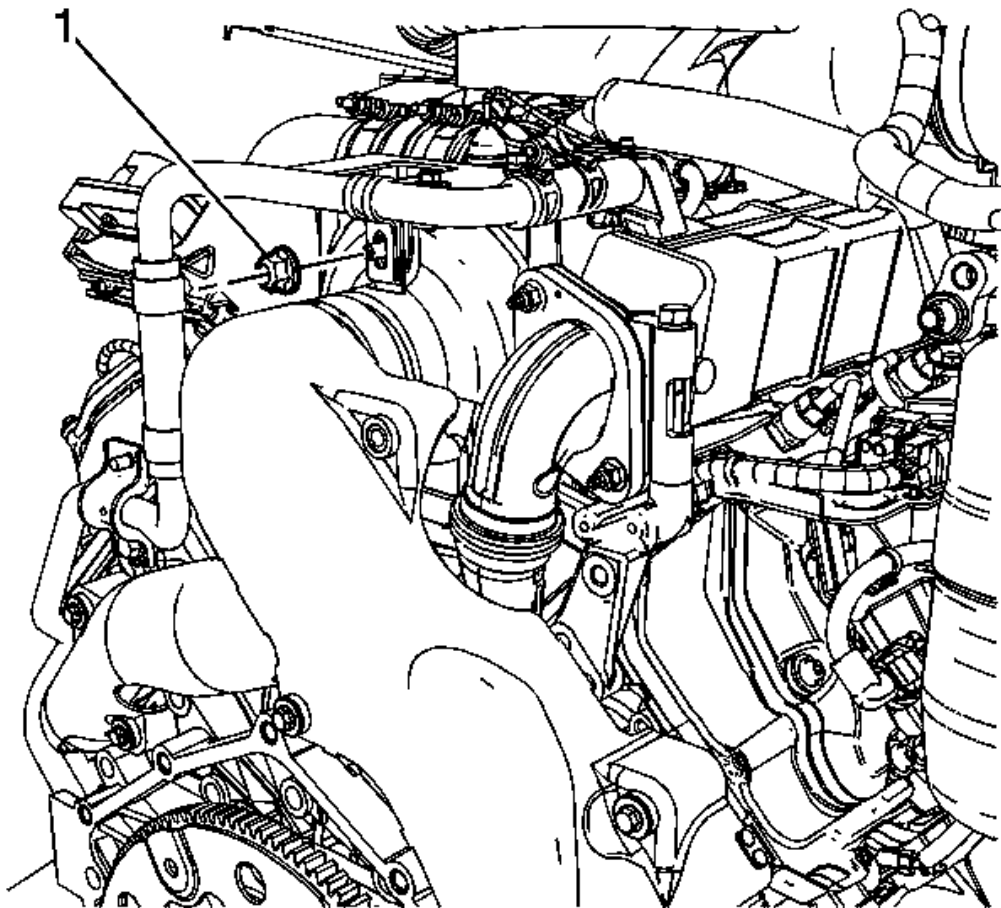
View Of EGR Cooler Pipe Clamp
